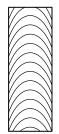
Impulse Rate Weld Example No. 1
